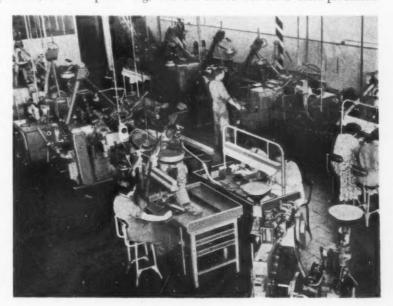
General View of the Roller-finishing Section of the N.B. Plant. There are Two Parallel Lines Comprising Centreless Grinding, and Spherical-end Grinding Machines, Connected by Rotating-spiral Conveyors
